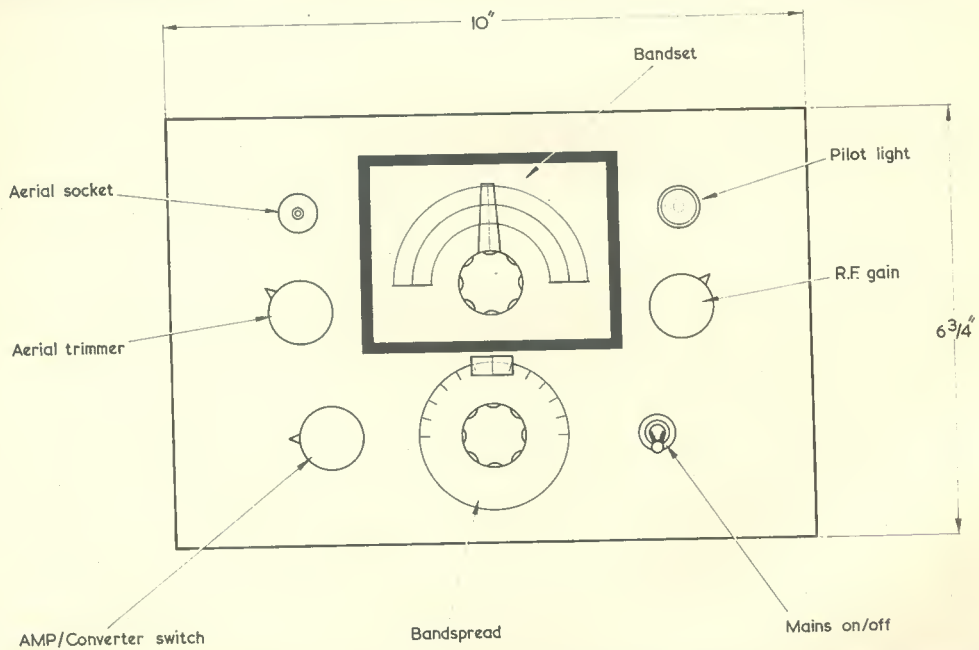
The front panel layout of the unit. Panel material is aluminium sheet. The bandset cursor may be made from a small piece of Perspex, this being fixed to the flange of the slow motion drive
